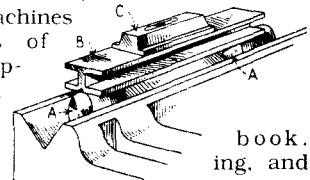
Using same equipment to check high or low spots on each side of bed.
